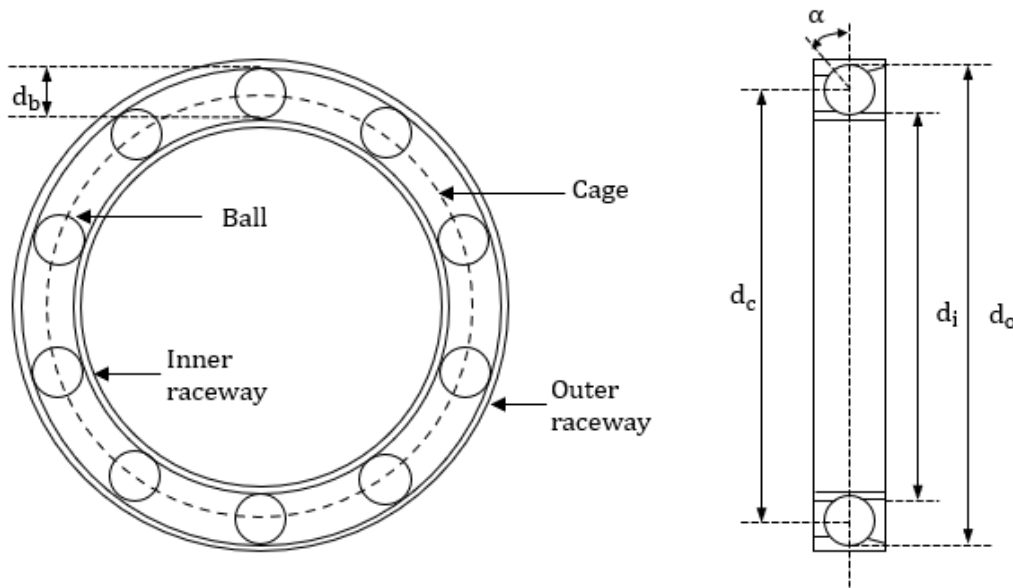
Graphical representation of a rolling bearing: the axial view (left) and the cross-section view (right).
